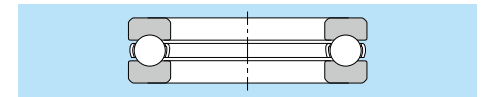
Single direction thrust ball bearing (example of pressed cage)
